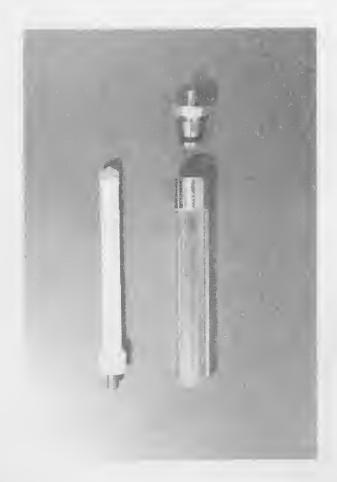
Disassembled plunger-cylinder unit. Seal used here is the Sealpruf Kap Seal.
